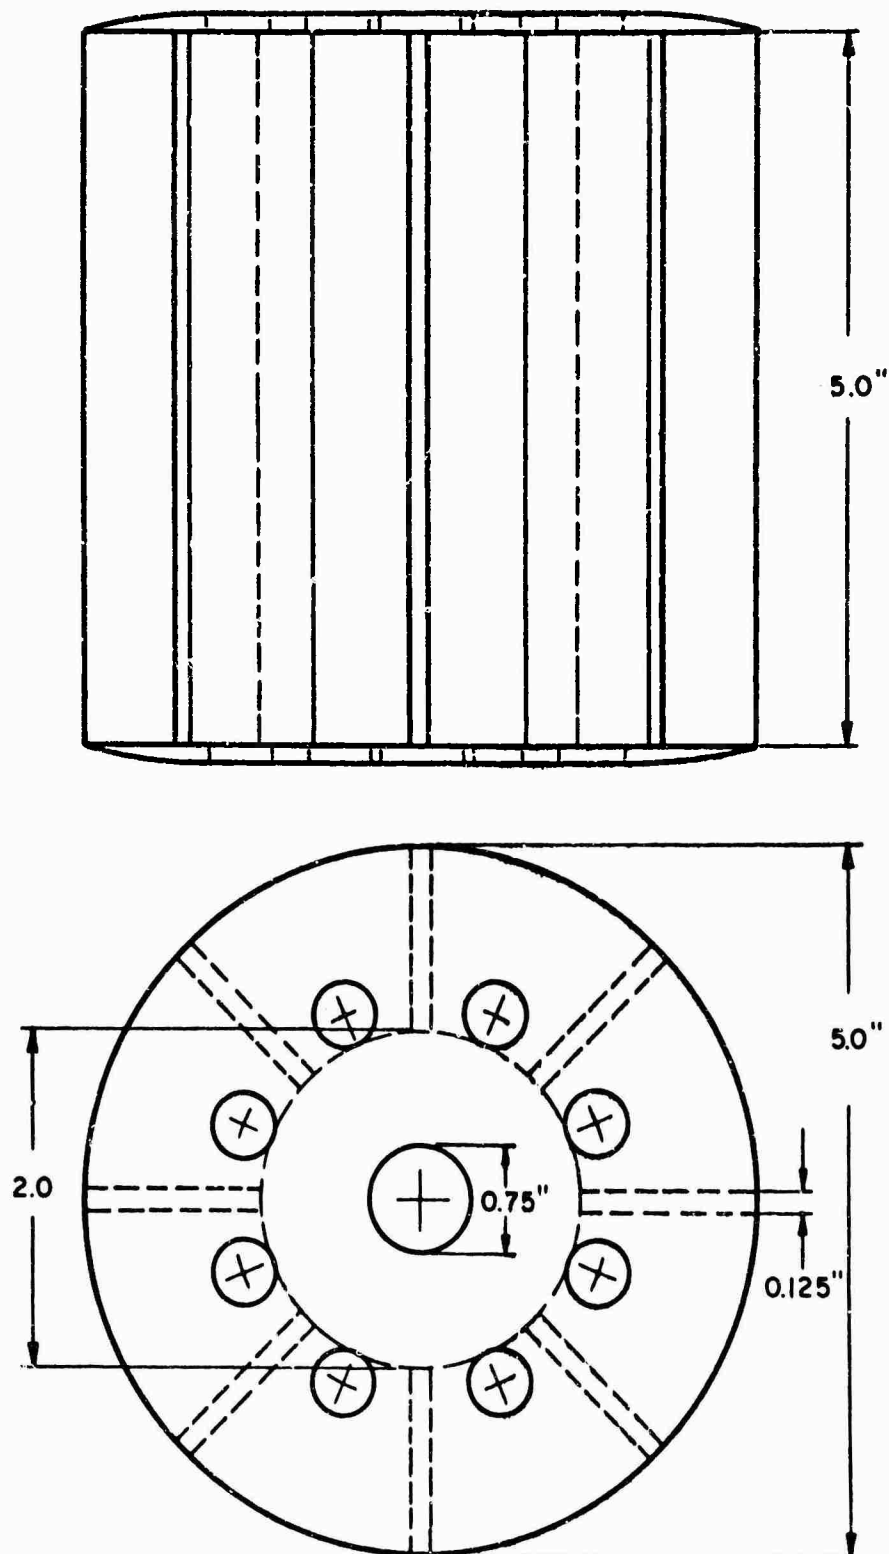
MODEL PADDLE WHEEL WITH FIXED RADIAL BLADES AND END PLATES
